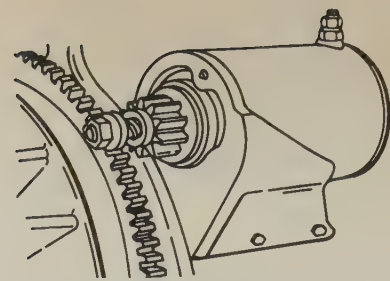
Relationship of ring gear to pinion gear of Bendix drive. Incorrect alignment will cause poor meshing and rapid tooth wear. (Kohler Company)
